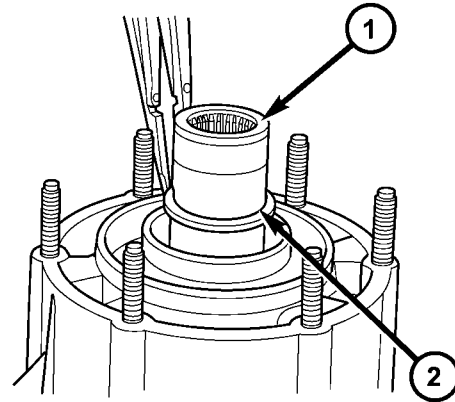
Remove the Drive Sprocket Drive Hub
